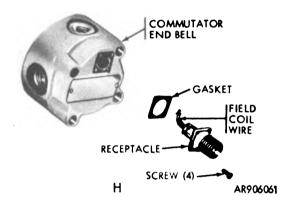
Turnet ventilating blower disassembly or assembly (3 of 3).
